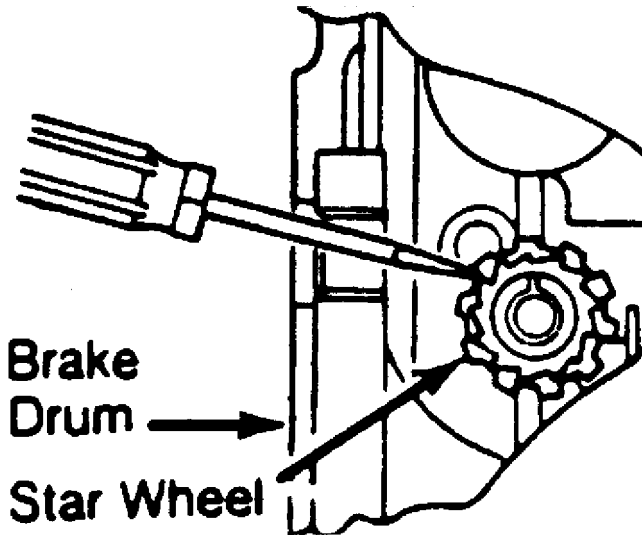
Adjusting Rear Brake Shoe-to-Drum Position
